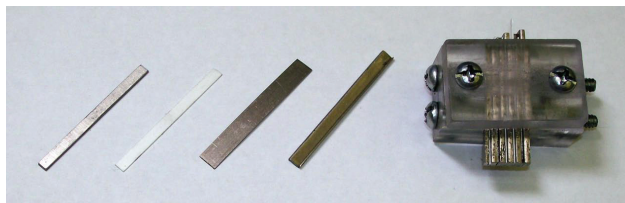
From right to left: chromel, zirconia-toughened alumina (ZTA), unbent alumel, bent alumel, and jig for welding thermopile strip together.
